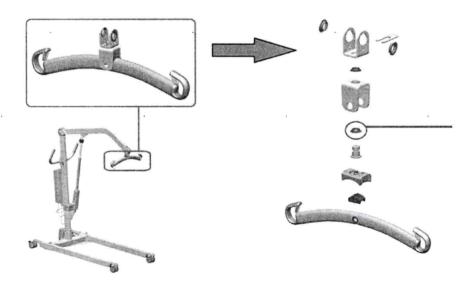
Mechanism and parts included in the sling bar for M220/M230. Bushing marked in red.
